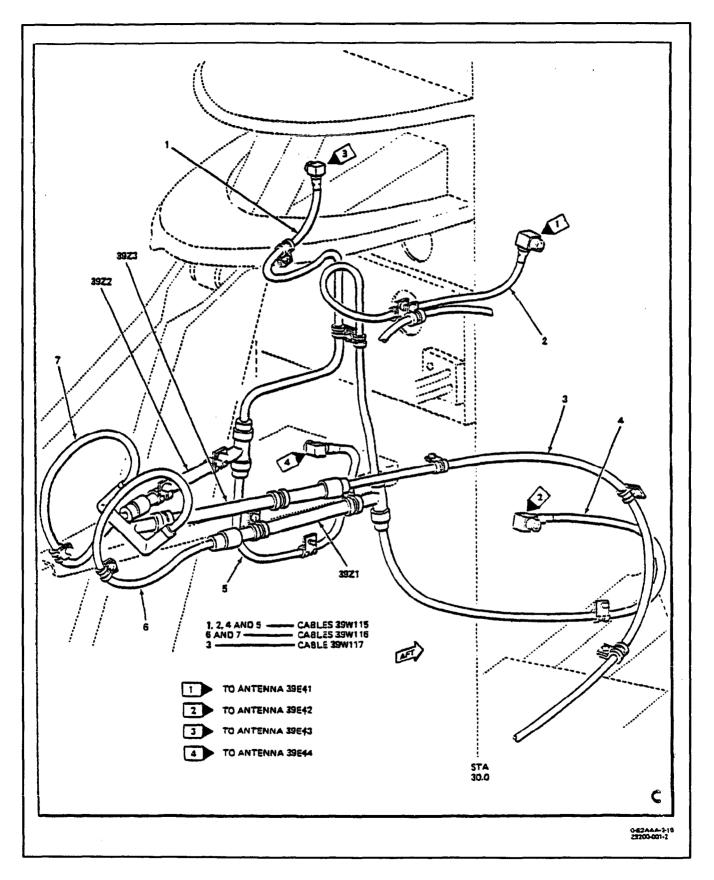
Removal and Installation of Configuration 1 Power Splitters and Cable Assemblies (Sheet 2)
